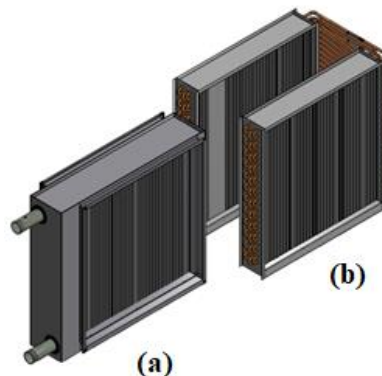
View of (a) coiling coil and (b) Wrap-around heat pipe
